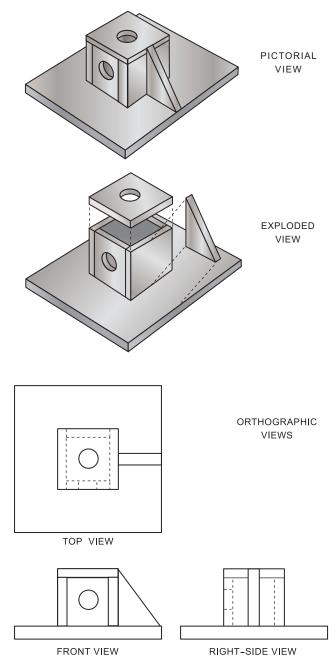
Types of drawings that can be used to show a weldment assembly.
